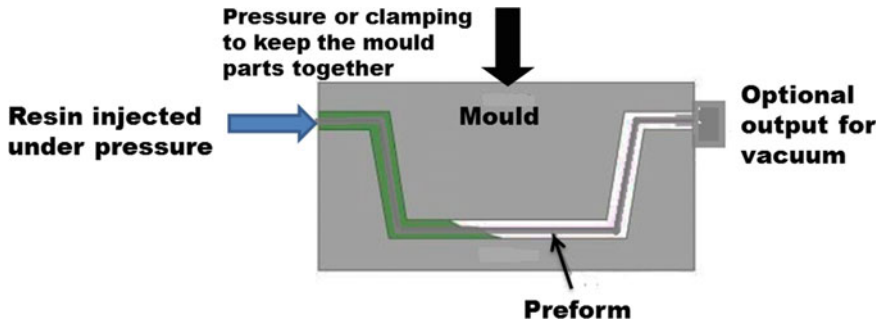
Schematic diagram of Resin Transfer Moulding (RTM) technique
